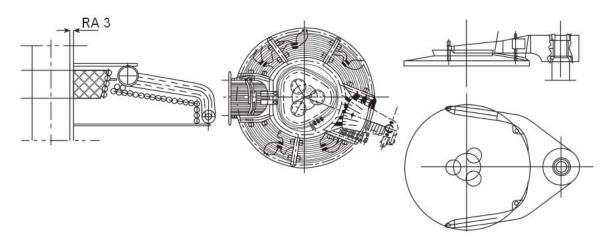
EAF roof and roof lifting configurations. (Courtesy of Danieli.)
